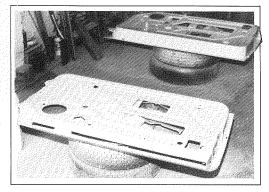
Insides of the doors just sprayed. Old tyres form excellent tables for this.
